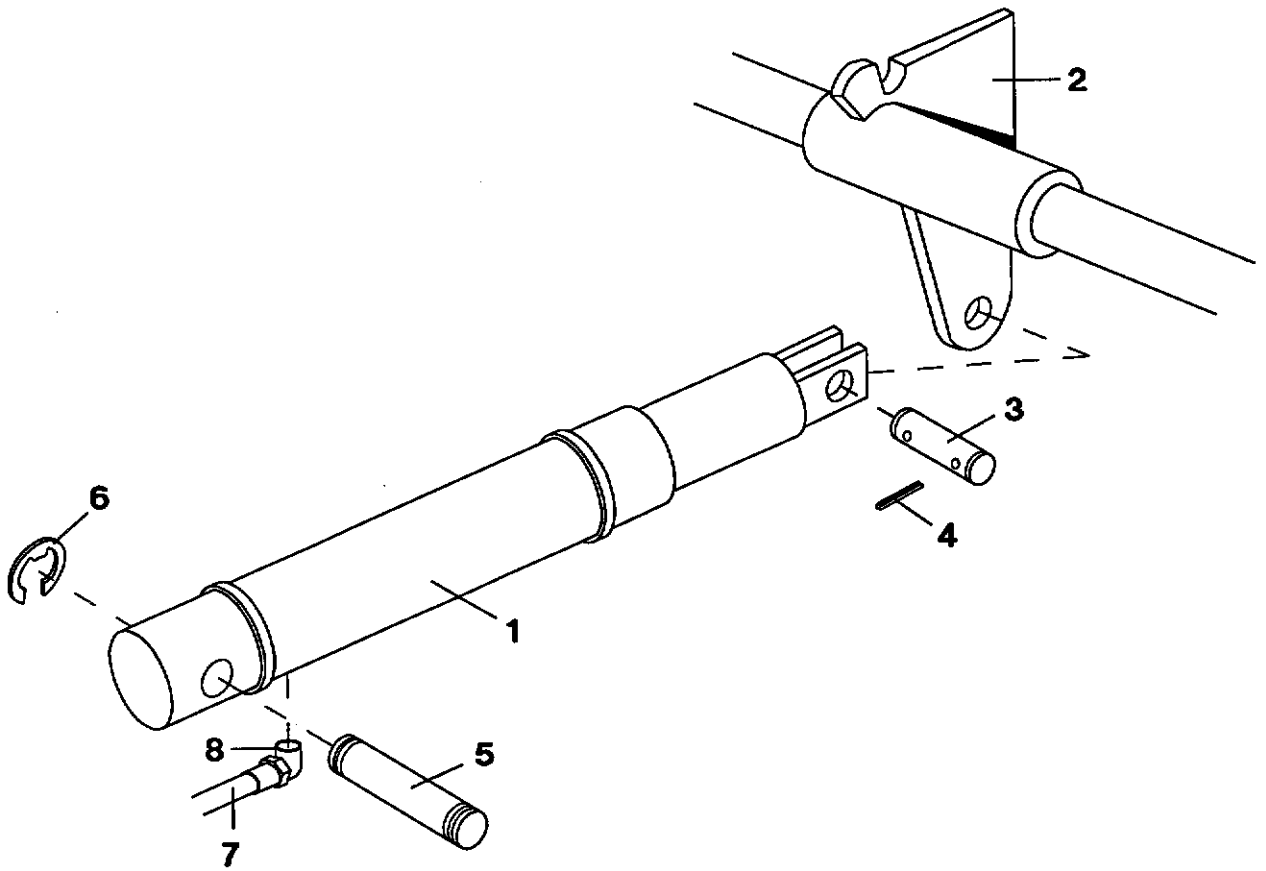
FIG. A - PARTS OF SUBFRAME, LIP AND DECK
